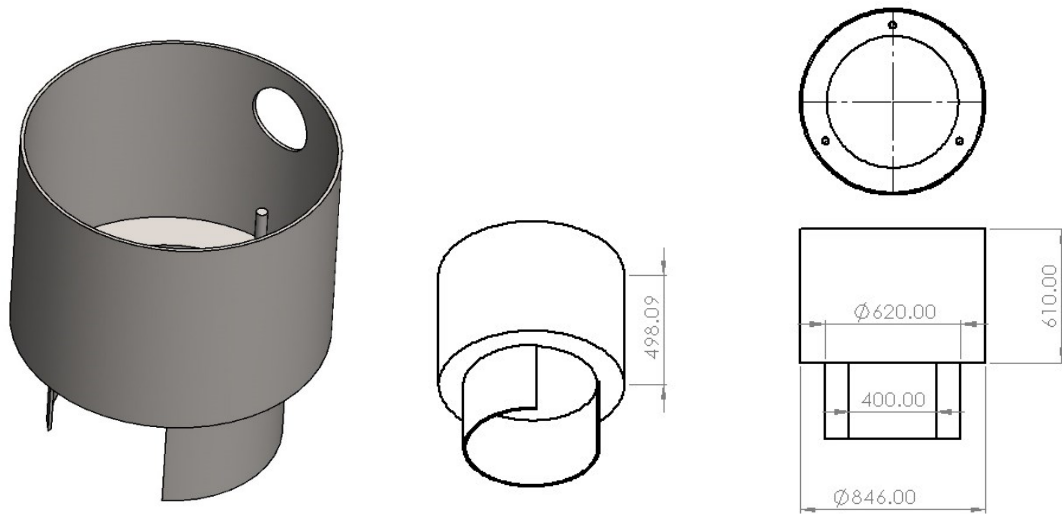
Inner Sheet Metal with its dimensions of Cylindrical Cook-Stove Model.
